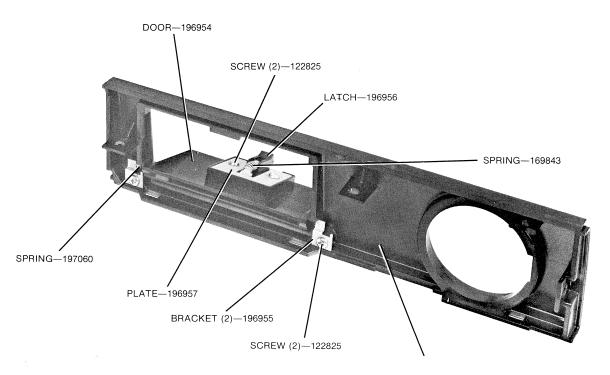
LAMP DOOR ASSEMBLY—197004
